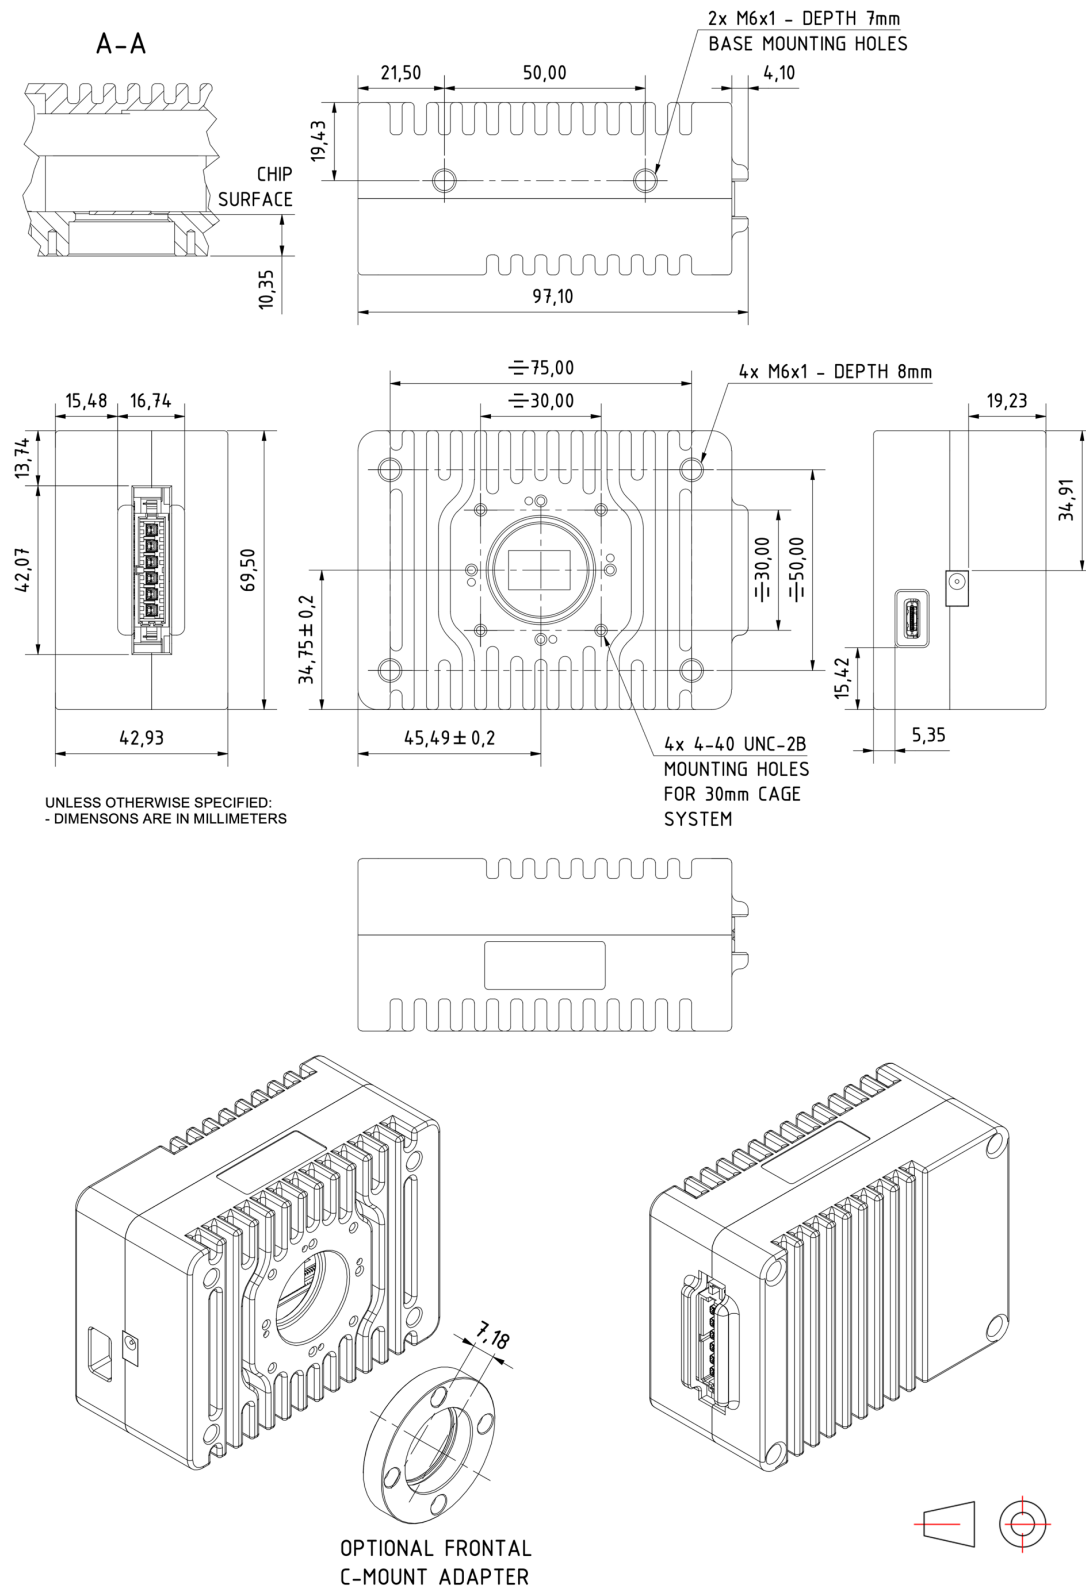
CRONO mechanical dimensions. All dimensions in mm. Camera's weight is 720 g.
